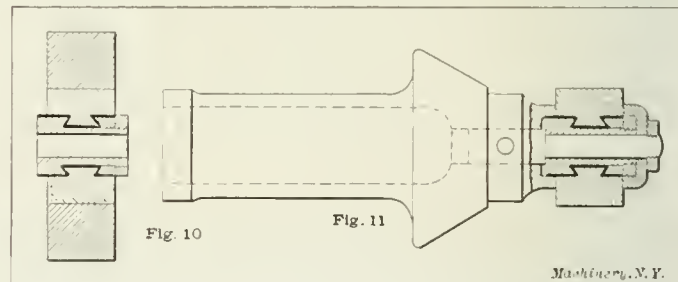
Section through Turning Ring and Blank showing Sleeve and Insulations assembled ready to be faced from Ring. Fig. 11. Turret Lathe Arbor Indicating method of Clamping the Copper by the Sides
